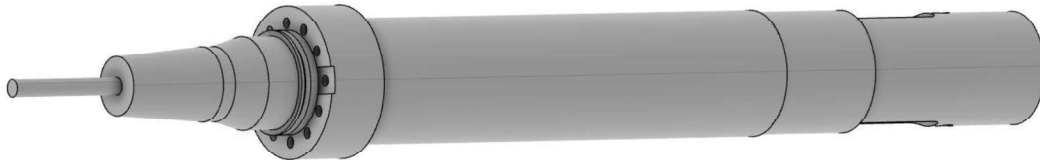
Solid Model of Shaft, Tool Holder, and Tool
